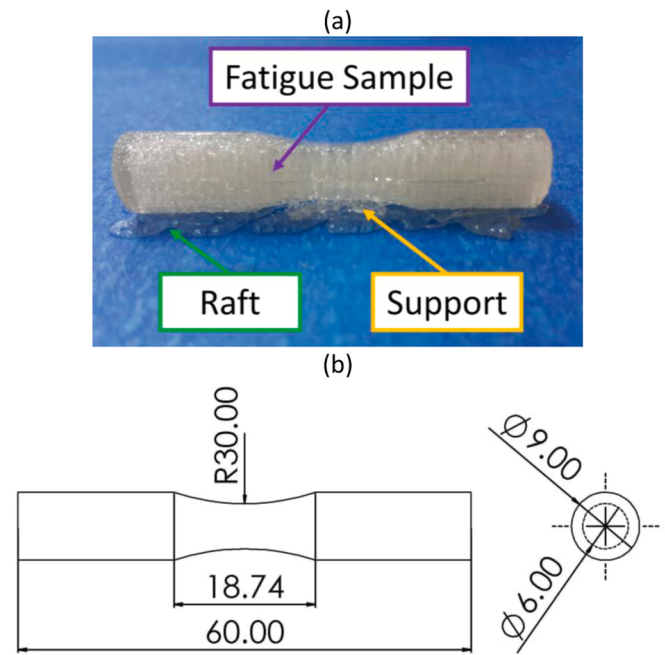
The (a) printed and (b) schematic geometry of dog-bone standard samples.
